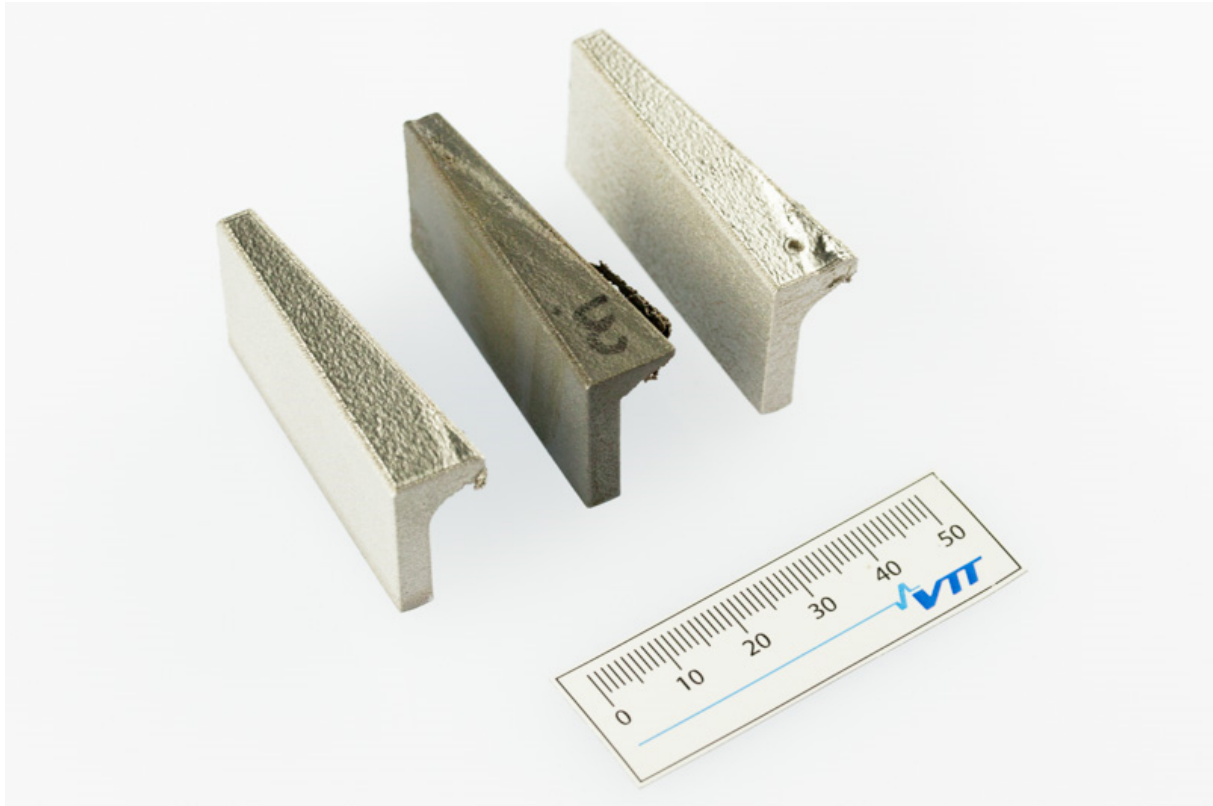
The overhang test pieces with and without fillet printed in H13 (middle) and 316L.
